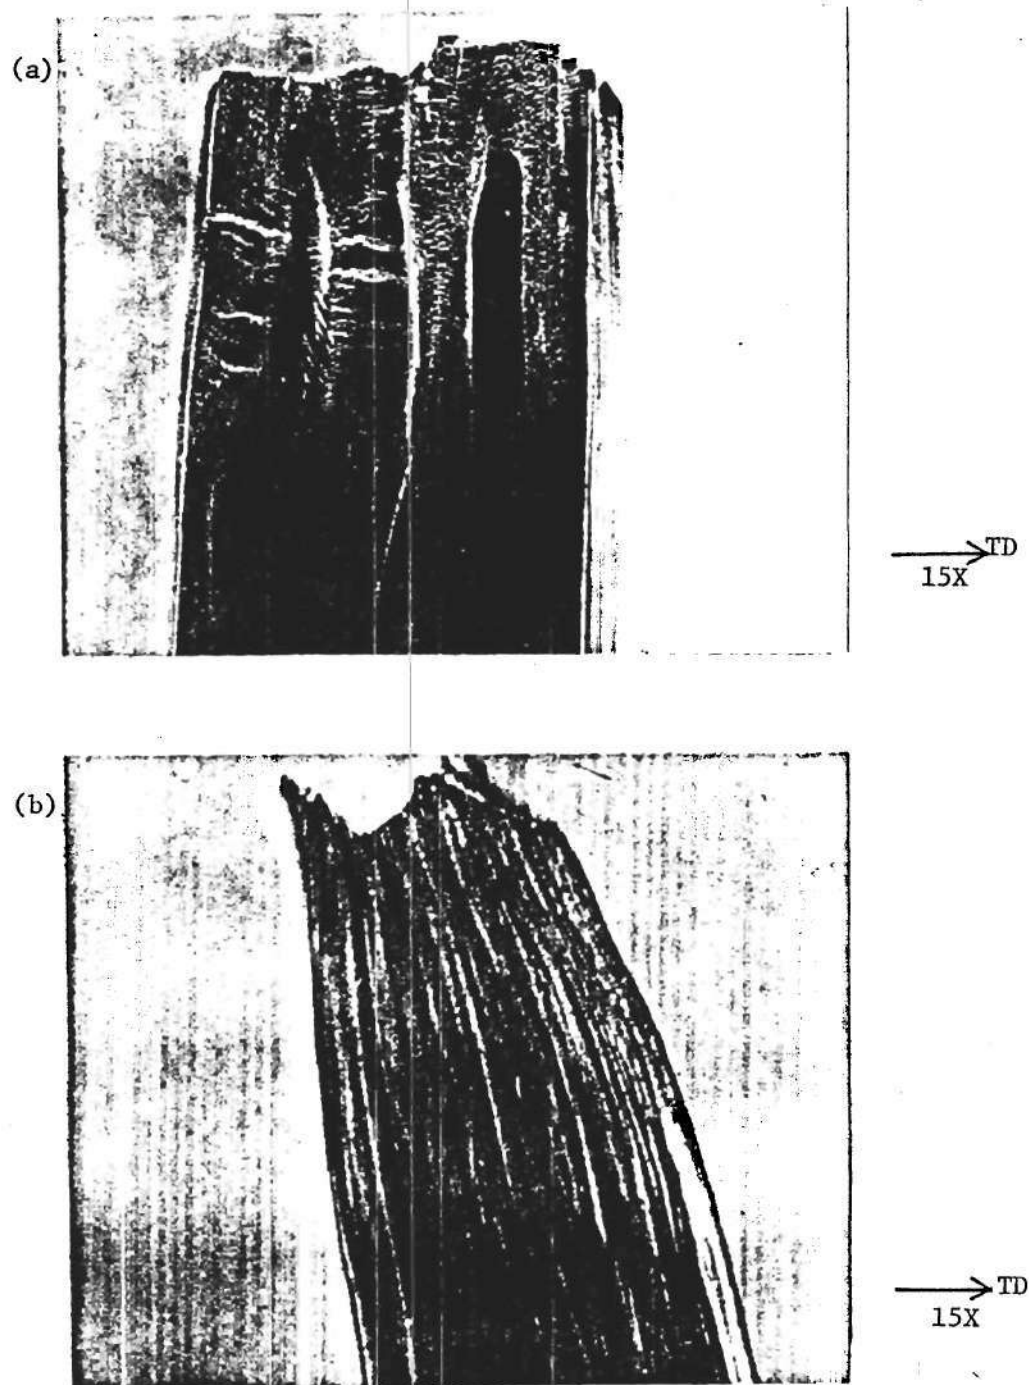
CY Alloy Furnace Cooled from 910°C , Tensile Specimen Tested at 350°C : (a) macrograph showing "orange peel" effect, and (b) "orange peel" effect and severe flow near fracture surface.
